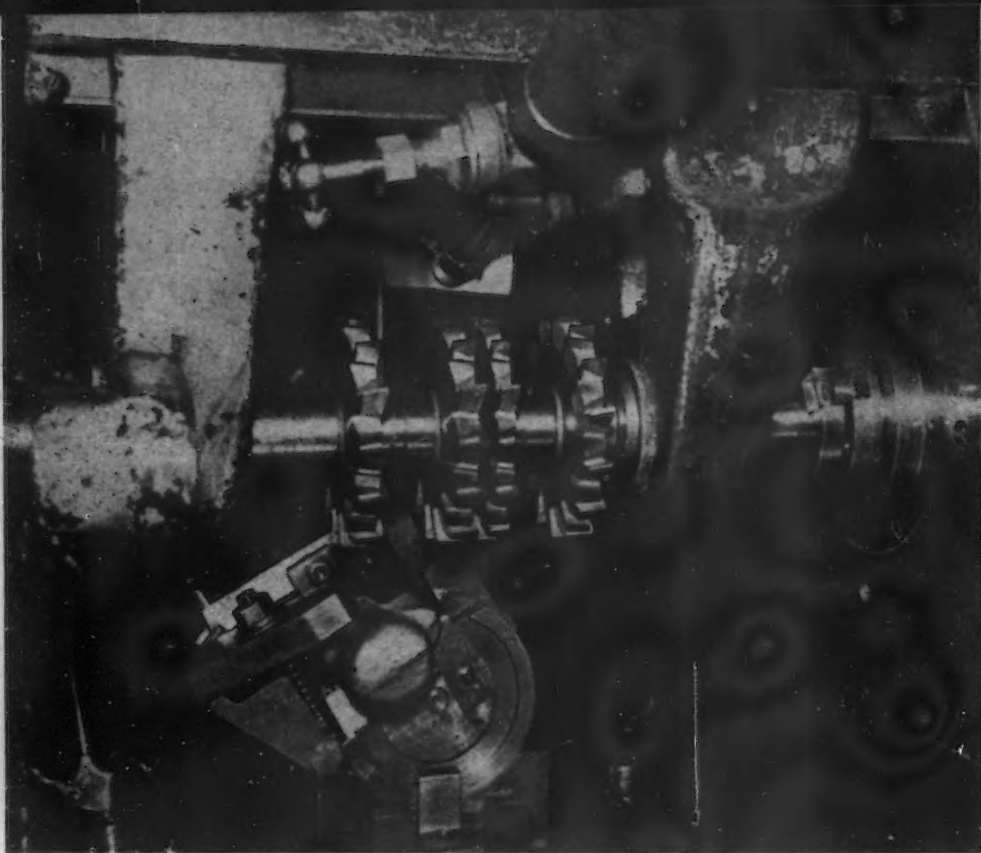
Conventional setup for straddle milling the square end of the forging shown in Fig. 3. Four 6-in. staggered tooth H.S.S. cutters are used.
